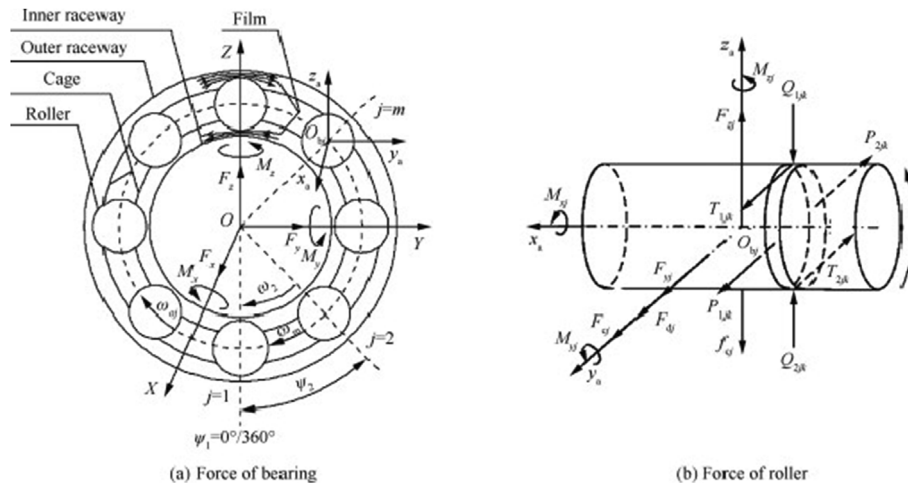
Force equilibrium of the bearing and the rollers [41].
